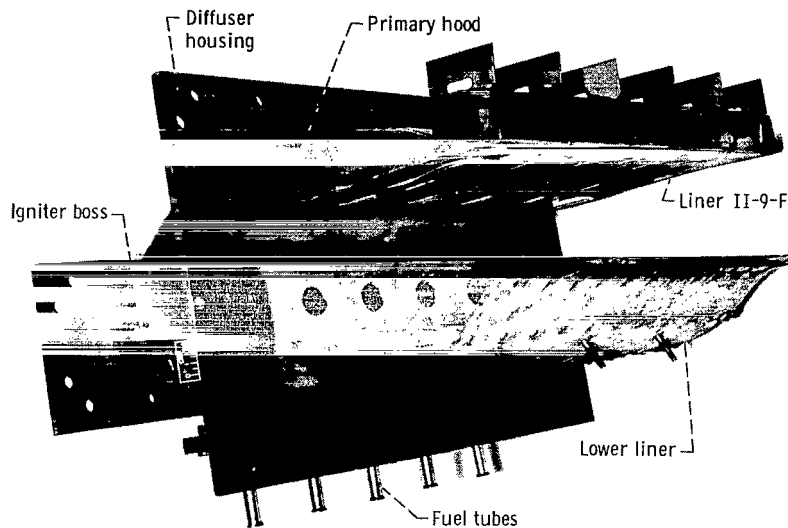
Combustor test section: liner II-9-F. Dimensions are in inches (m).
